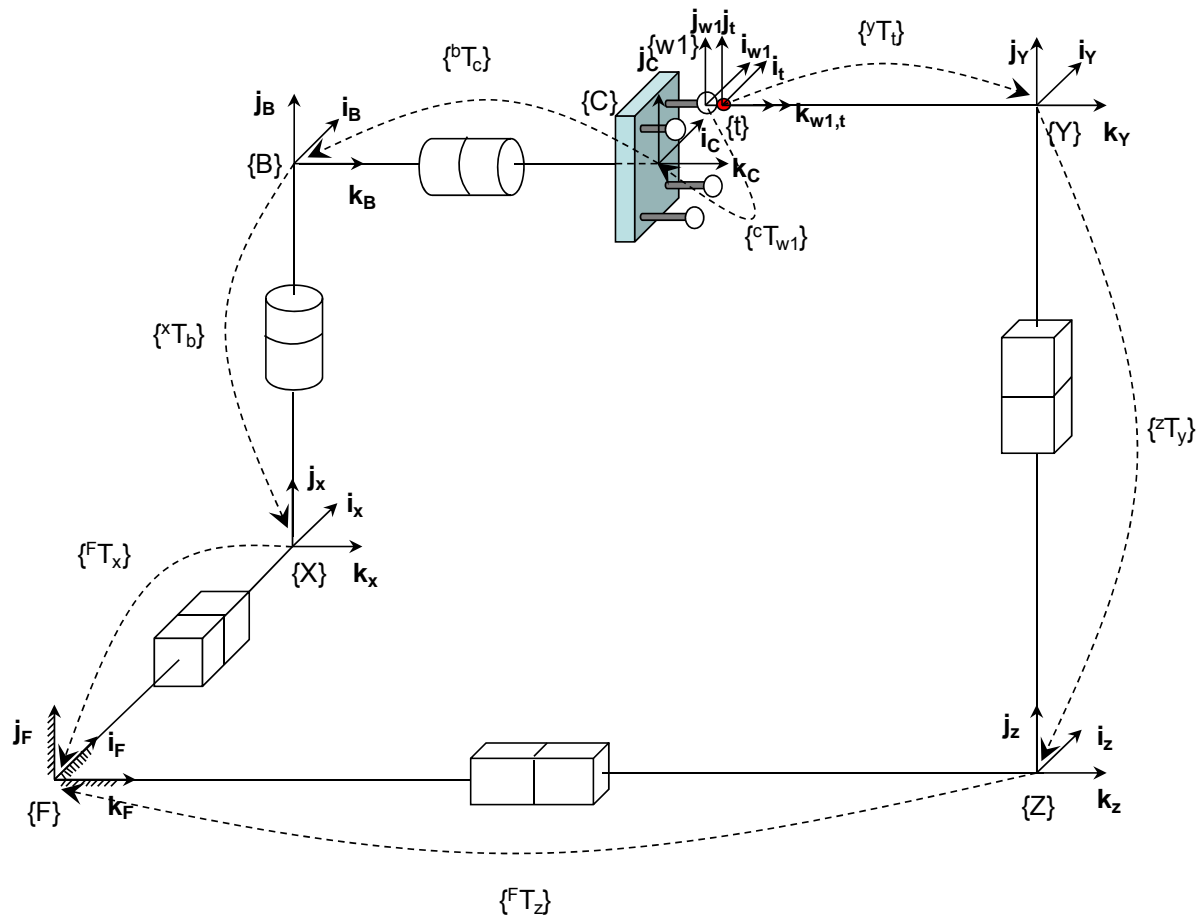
Nominal model of a five-axis machine with WCBXFZYT topology.
